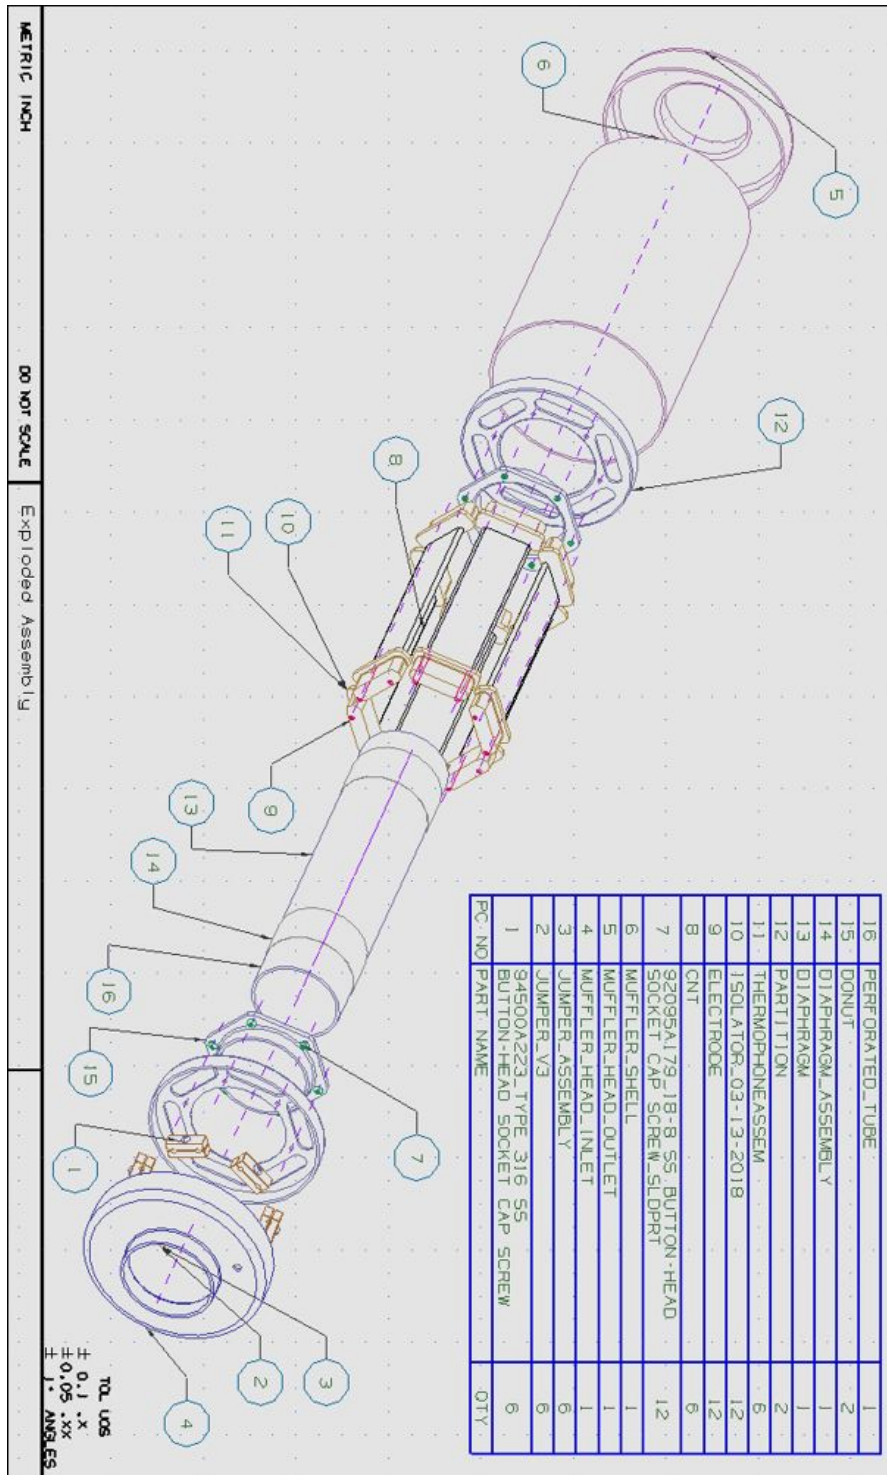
3D assembly drawing of third coaxial CNT speaker prototype.
